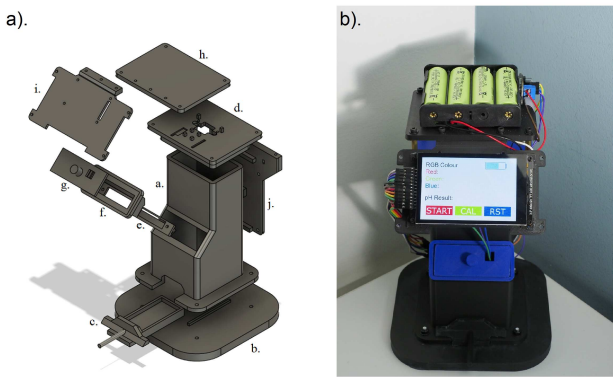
Design and build of the test machine, a) test machine design, b) test machine build.
